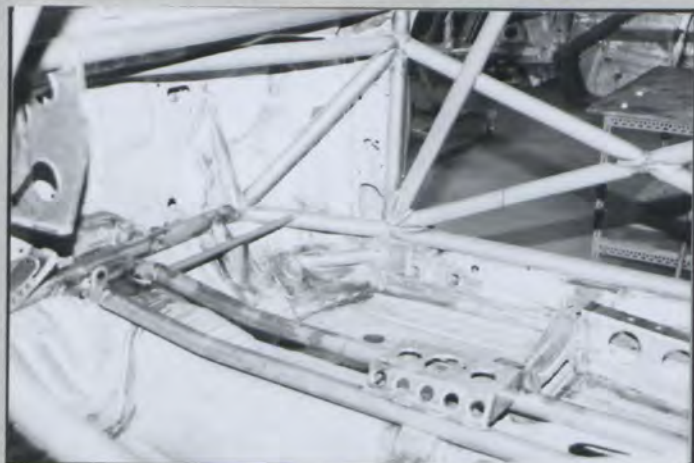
MAIN HOOP TO ROOF (LEFT)
